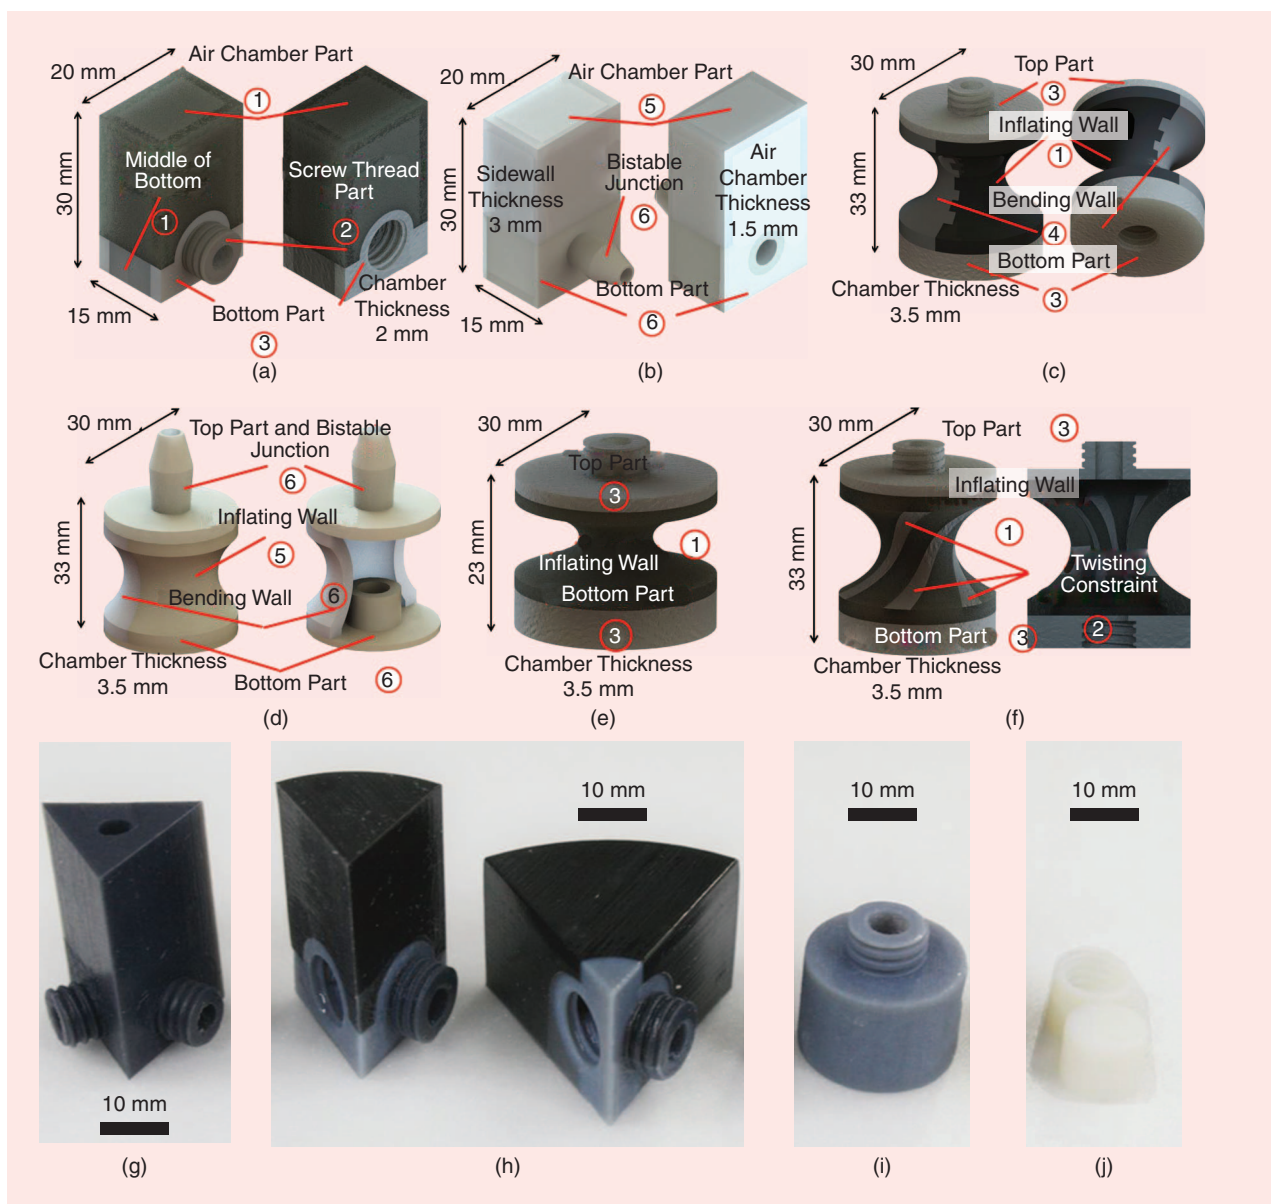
The details of motion-generating units. (a) and (b) Front and rear views of the cooperating bending unit. (c) and (d) Top and bottom views of the independent bending unit. (e) Translating unit. (f) Side and cross-sectional views of twisting units. (g)–(j) Noninflatable units and angled units. (g) A three-way air distribution unit. (h) Two angled units. (i) A connecting cap. (j) A sealing cap. Schematics for the multimaterial 3-D-printed units are shown at the left sides of (a)–(f). (b) and (d) show units made of elastomer. The circled numbers refer to materials used at the indicated parts of units: 1, TangoBlack+; 2, FLX9895-DM; 3, RGD8530-DM; 4, FLX9870-DM; 5, Ecoflex 0030; 6, Dragon Skin 30. Materials 1–4 are from Stratasys Ltd., and materials 5 and 6 are from Smooth-On, Inc.
